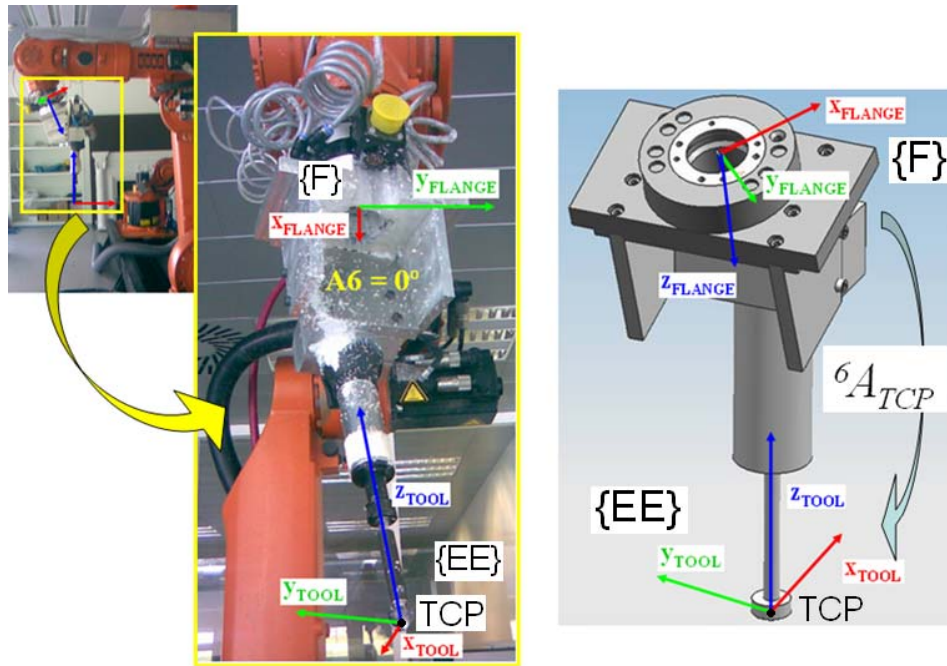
Tool holder designed for milling tasks at the IDF.
